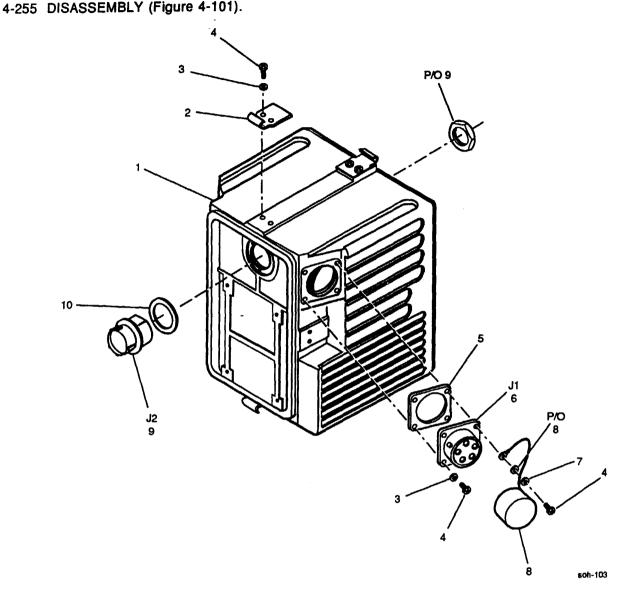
Housing Assembly (Sheet 1 of 2)
